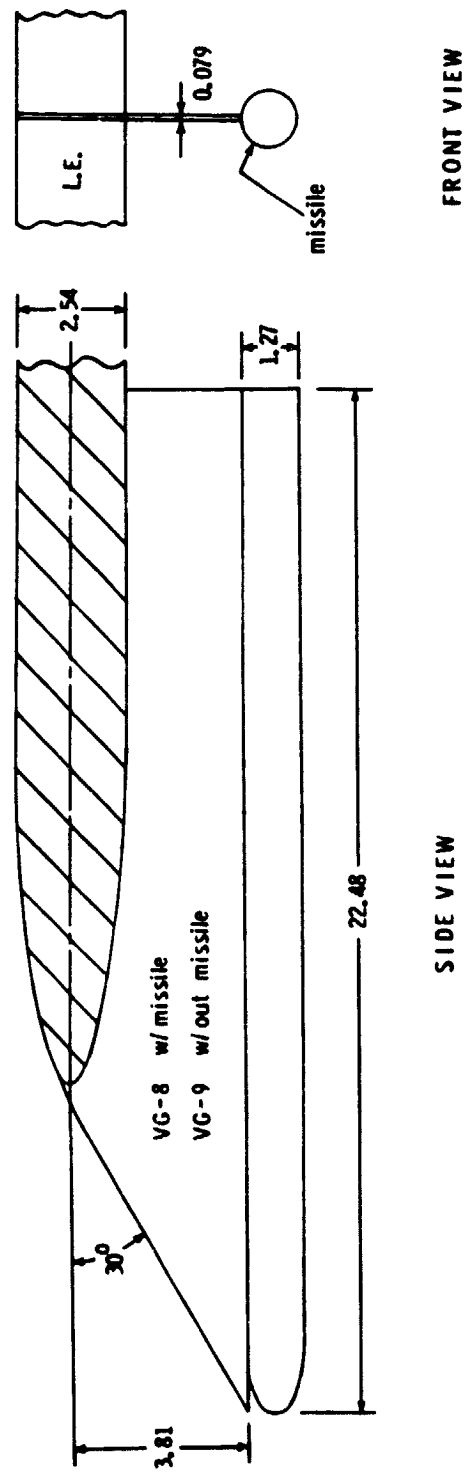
Drawing of pylon vortex generator with missile tested. Dimensions in centimeters.
